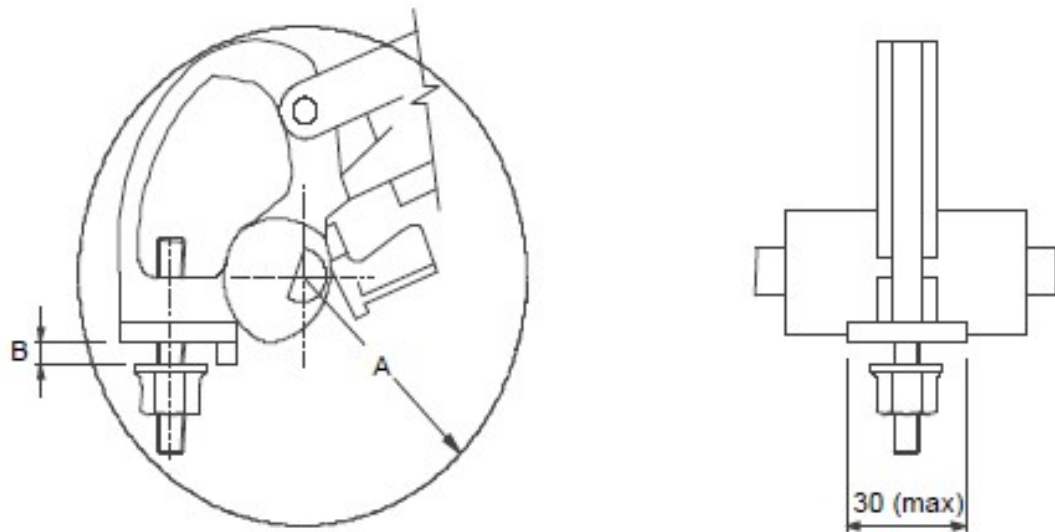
Fuse-carrier and solid-link lower contact (cam) details
